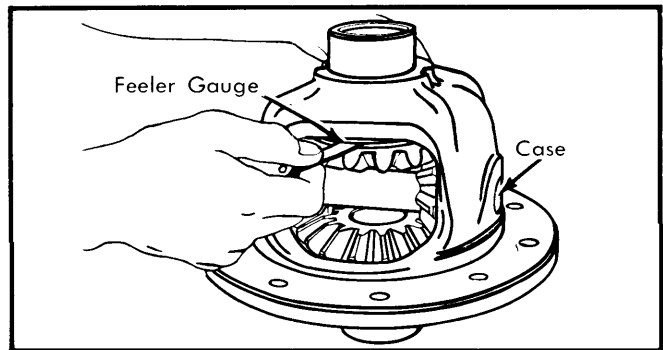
Measuring Side Gear-to-Thrust Washer Clearance
